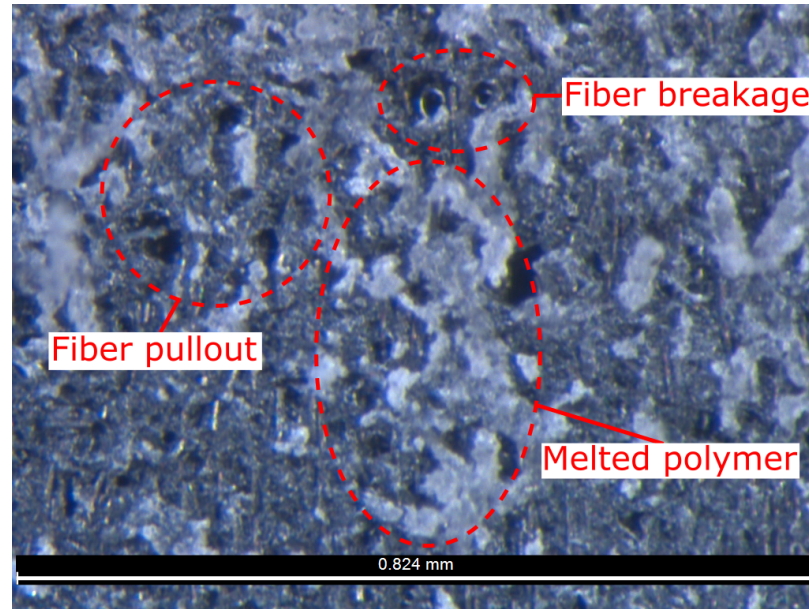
Stereoscopic image of the surface defects on the 3D printed composite (PPS with carbon fiber reinforcement) due to the machining process (9X magnified).
